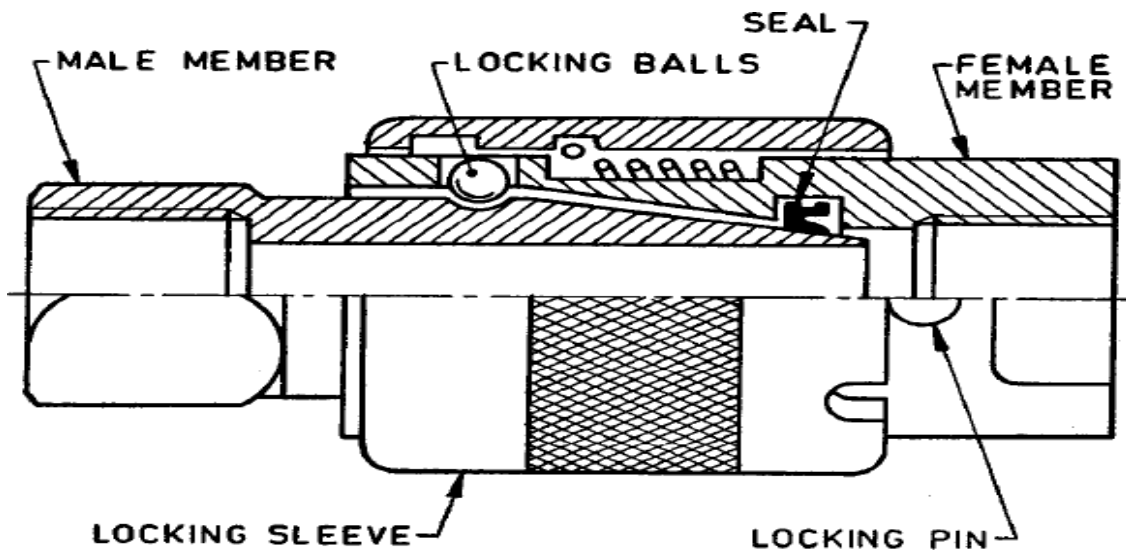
HALF SECTIONED GENERAL ARRANGEMENT OF CONTACT COUPLING
